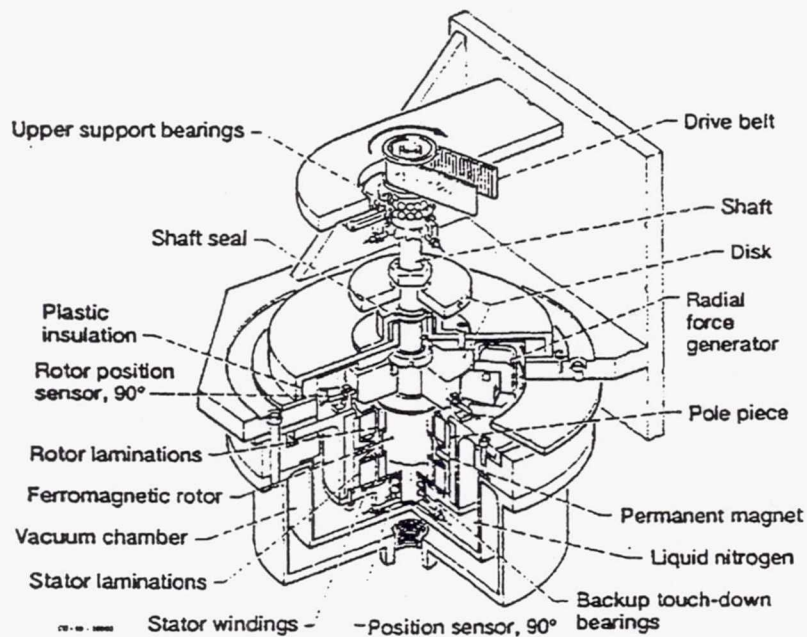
Cryogenic hybrid magnetic bearing and test rig.
